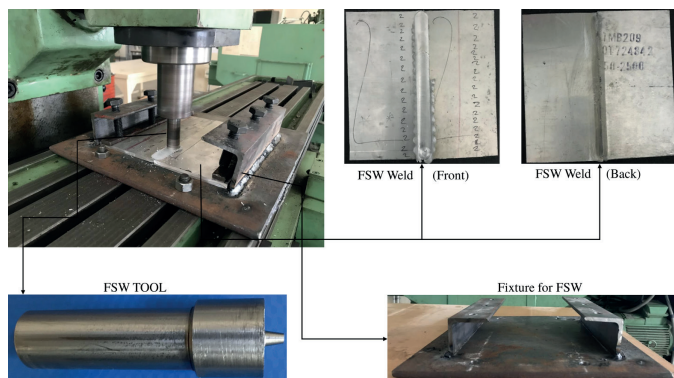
Friction Stir Welding setup prepared for the HMT FN2V vertical milling machine
